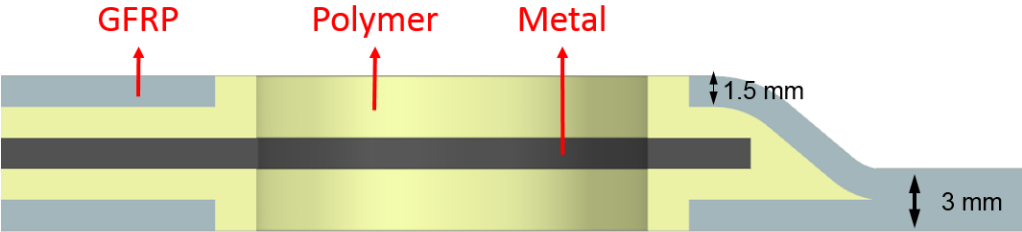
Cross-section dimensions of the composite laminate with metal-polymer insert
